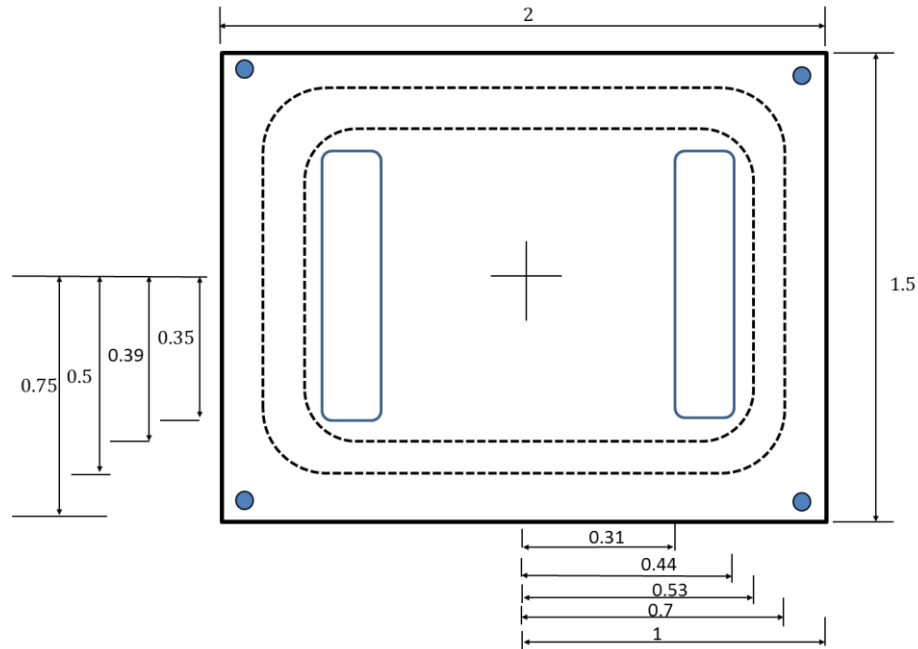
Cell top view: 2 in \times 1.5 in; Cell dimension: 2 in \times 1.5 in \times 1 in; Membrane area: 1.4 in \times 1 in; Membrane support area: 1.06 in \times 0.78 in \times 0.015 in; Cell alignment rod diameter: 0.125 in, length 0.25 in; Channel: 0.125 in \times 0.7 in.
